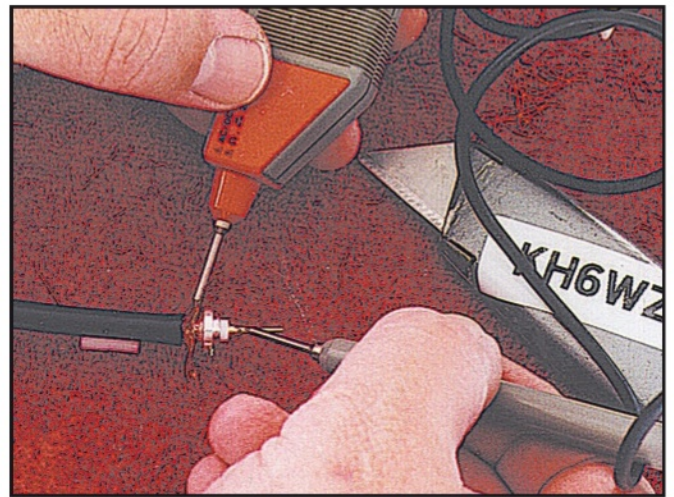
Check for short circuits between the center pin and shield as you assemble any connector.
